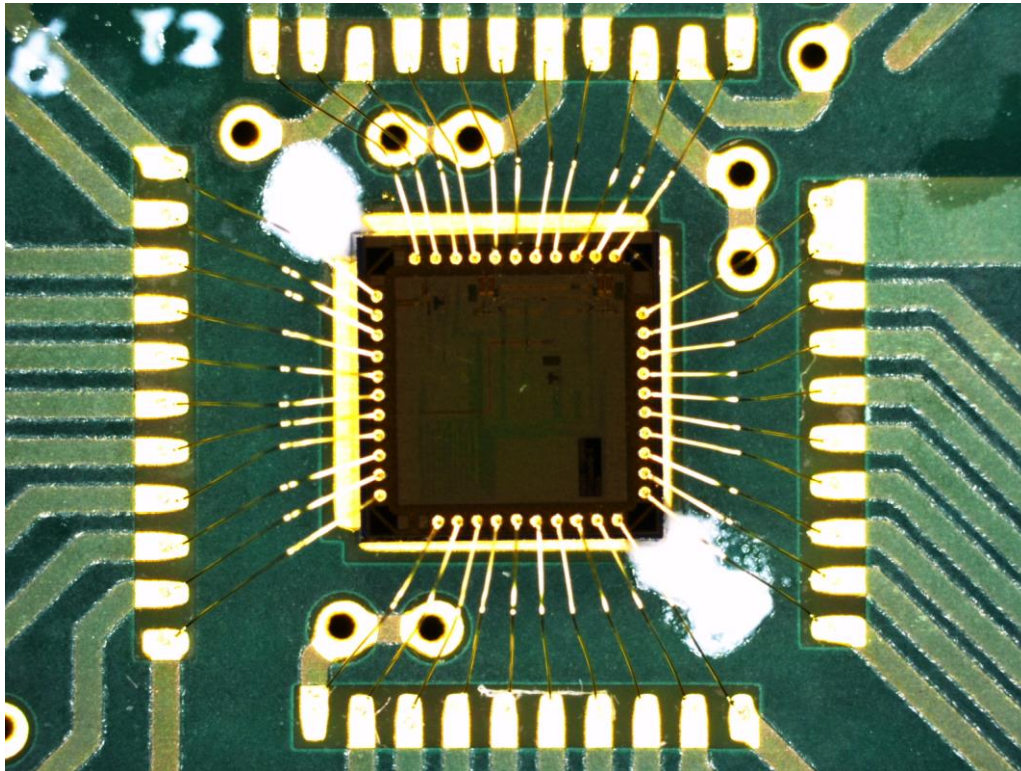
Test chip bonded to the test board by ball type bonder. The dimensions of the test chip is 2.5 mm x 2.5 mm.
